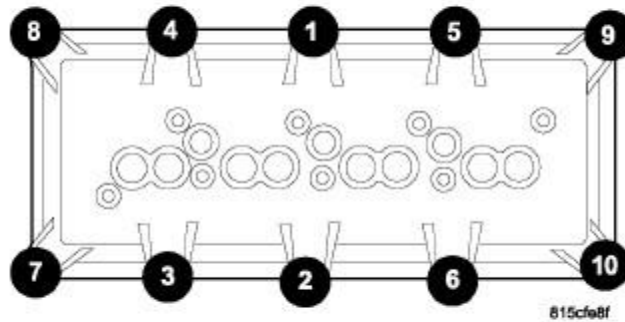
Cylinder Head Cover Removal/Tightening Sequence
